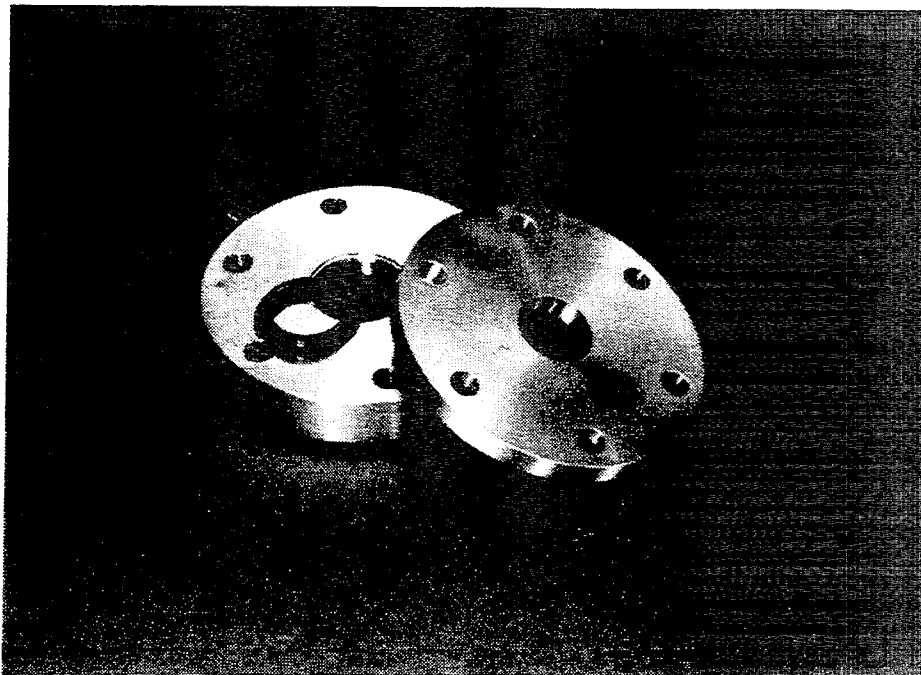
CRANKSHAFT SEAL AND ALUMINUM RETAINERS
